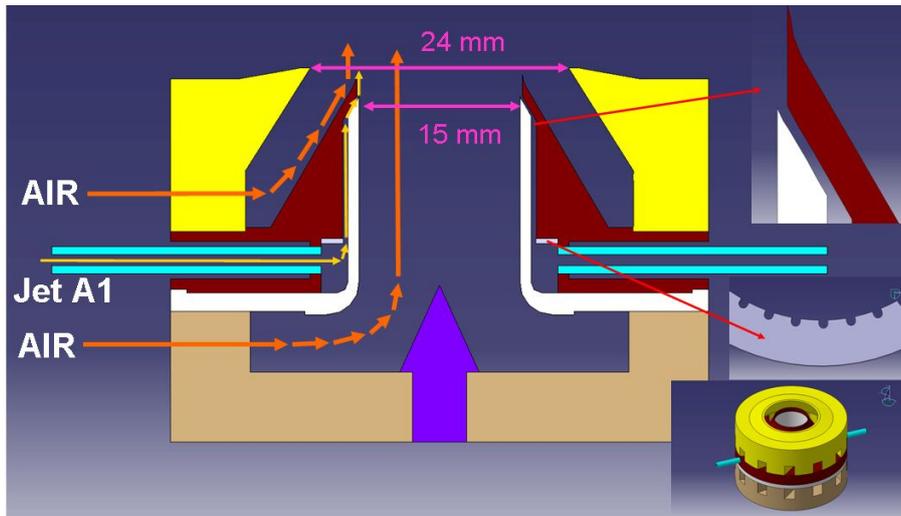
Schematics of the burner. On the right details of the fuel exit slot (top), the metering holes (center) and a 3D view of the assembly
